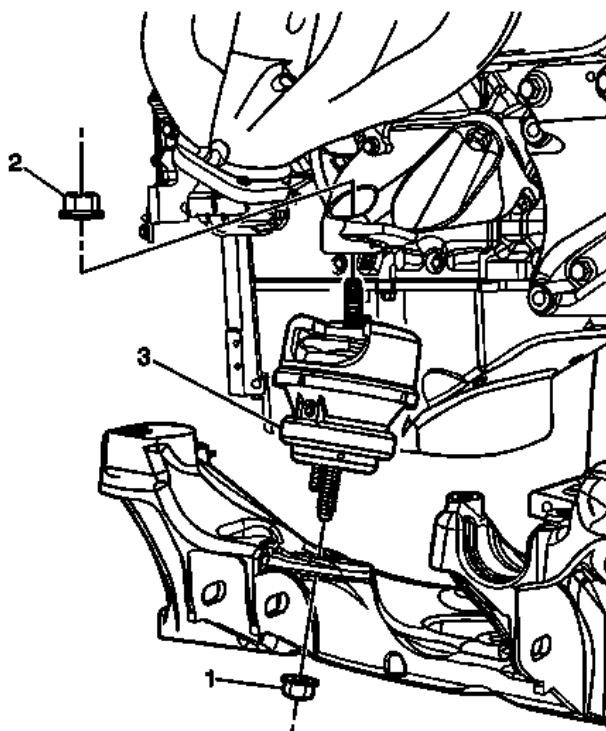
Identifying Engine Mount - Right Side (RWD)
